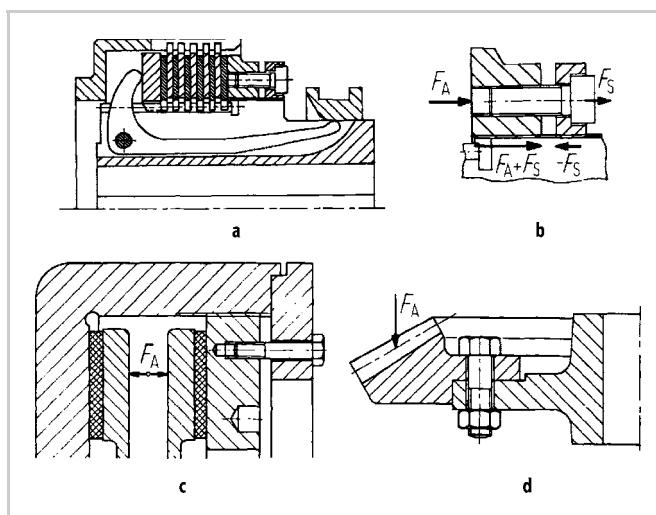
Self-helping bolted connections: a multiple disc clutch with adjustment ring; b force acting on the adjustment ring; c adjustable disc of two-disc friction clutch; d crown wheel attachment, symmetrical take-up of forces
